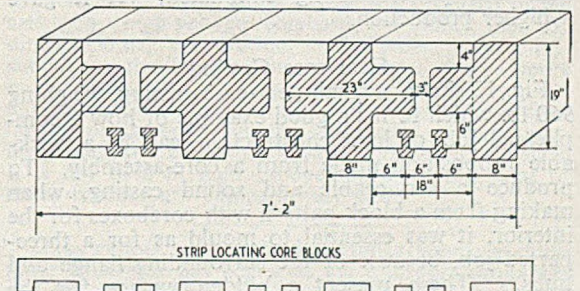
Simple Method of Core Assembly for a Job 8 ft. 9 in. long, 19 in. deep and 18 in. wide, using over 2½ tons of Metal.
